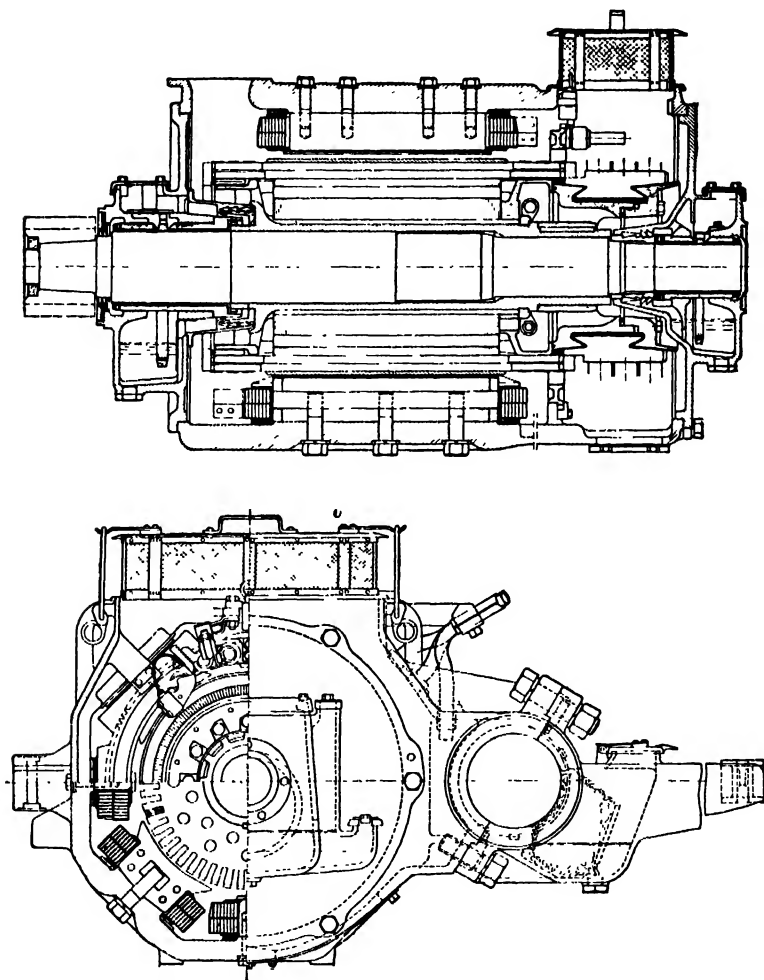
Longitudinal and Cross Section of Oerlikon 340 h.p., 500-volt locomotive motor for 5 ft. 6 in. Gauge.
